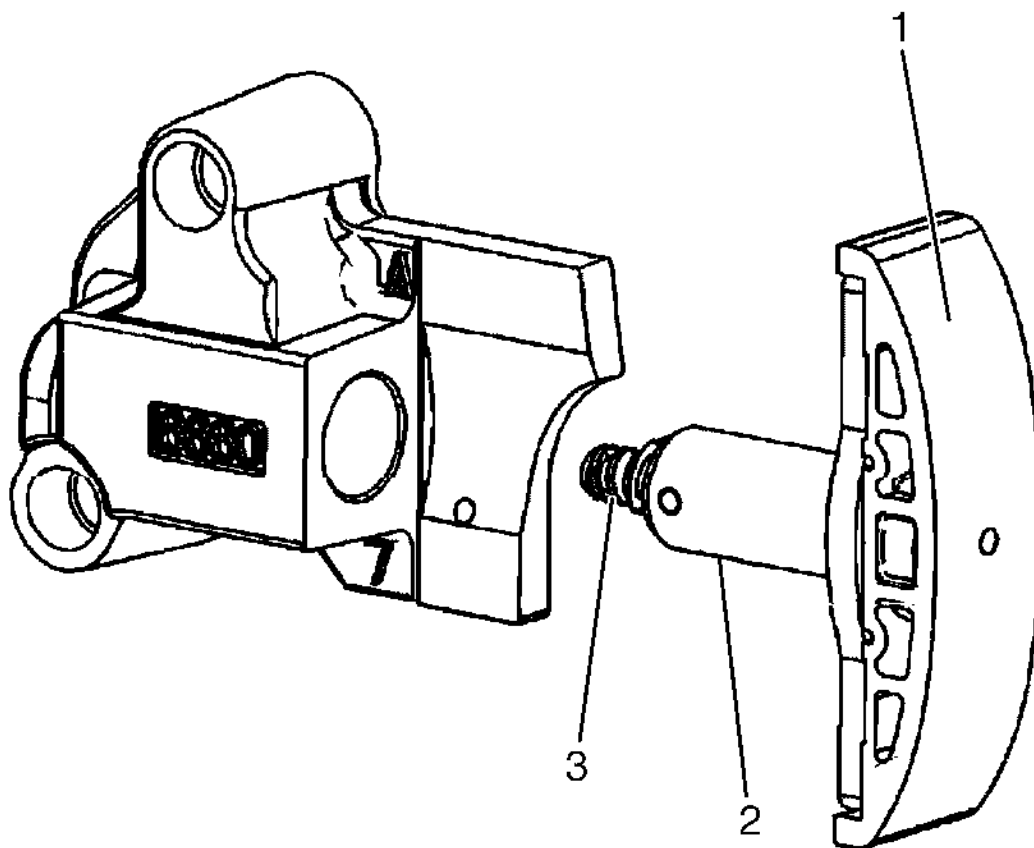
Identifying Right Secondary Timing Chain Tensioner Contact Pad
